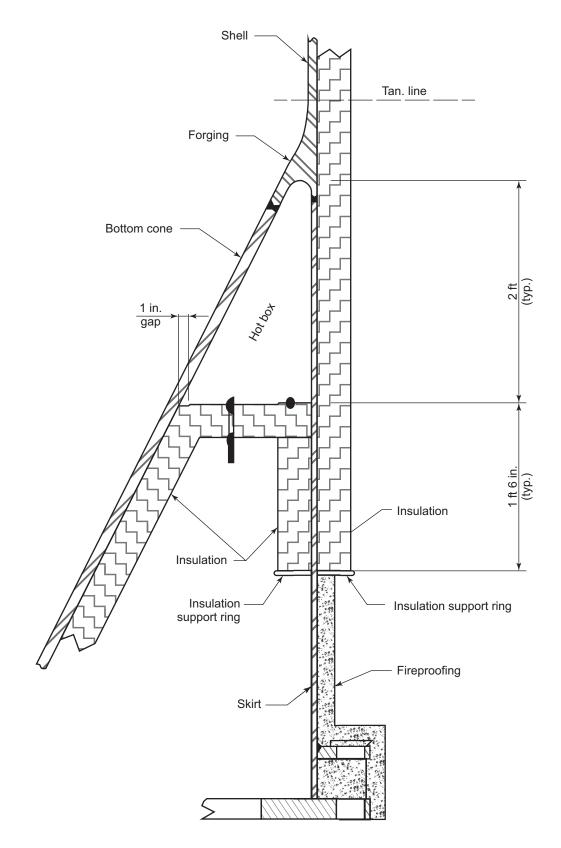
Typical "Hot Box" Insulation Details at the Skirt-to-Shell Connection
